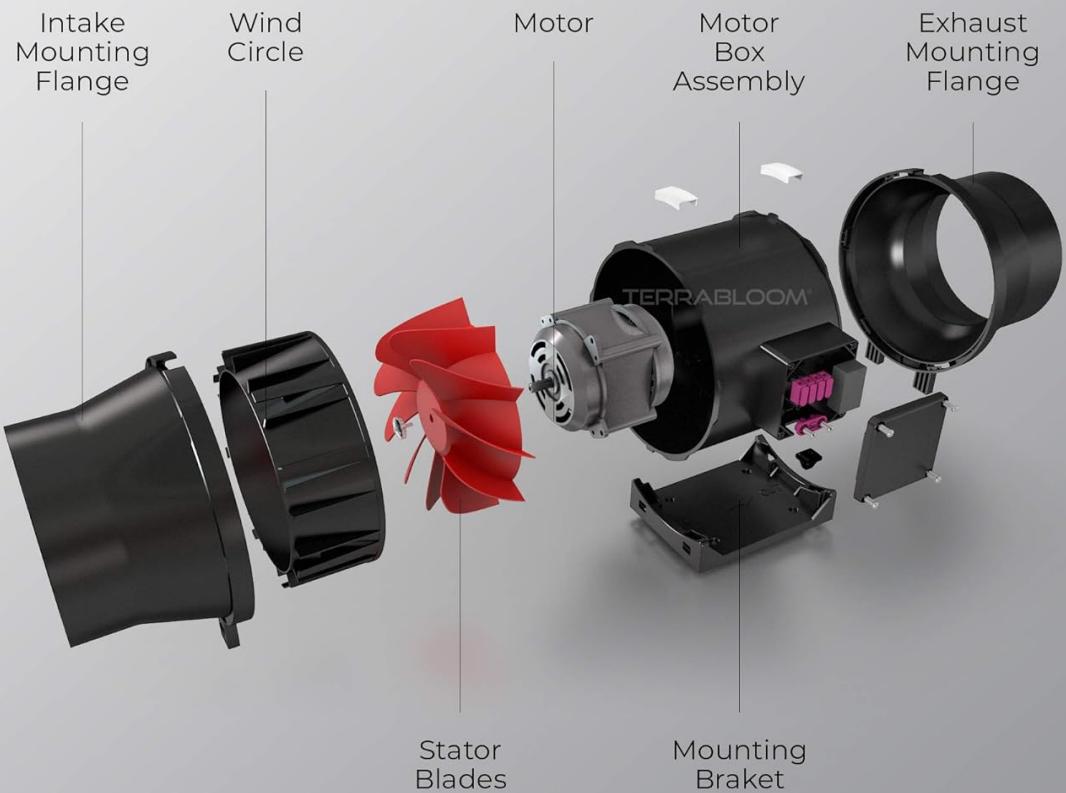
Exploded view illustrating the internal components of the inline fan.
